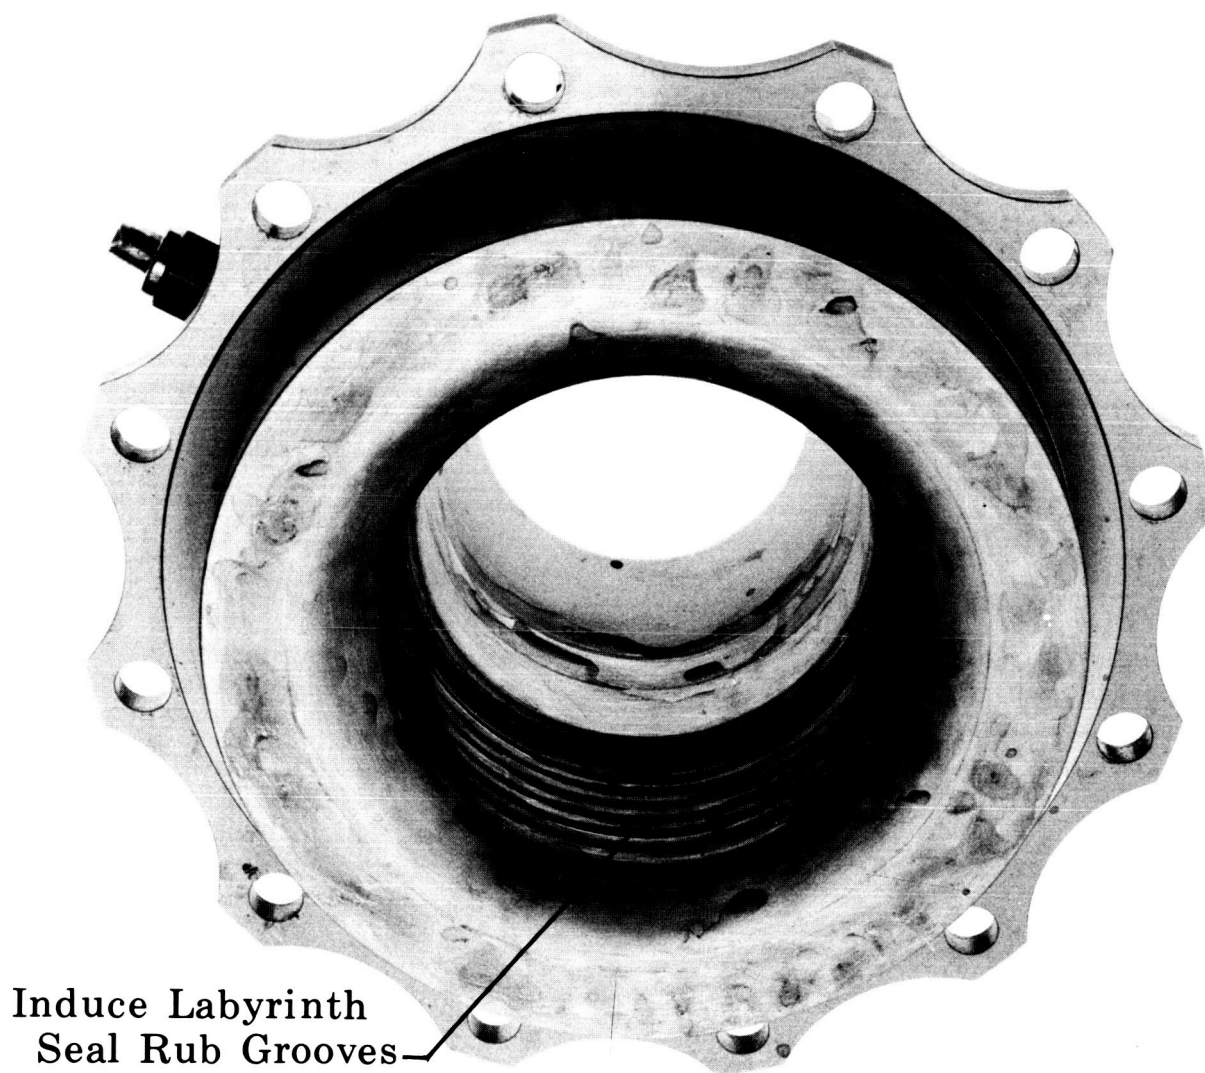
RL10A-3-3 Oxidizer Pump Inducer Housing (Rig B71C005-3A)
